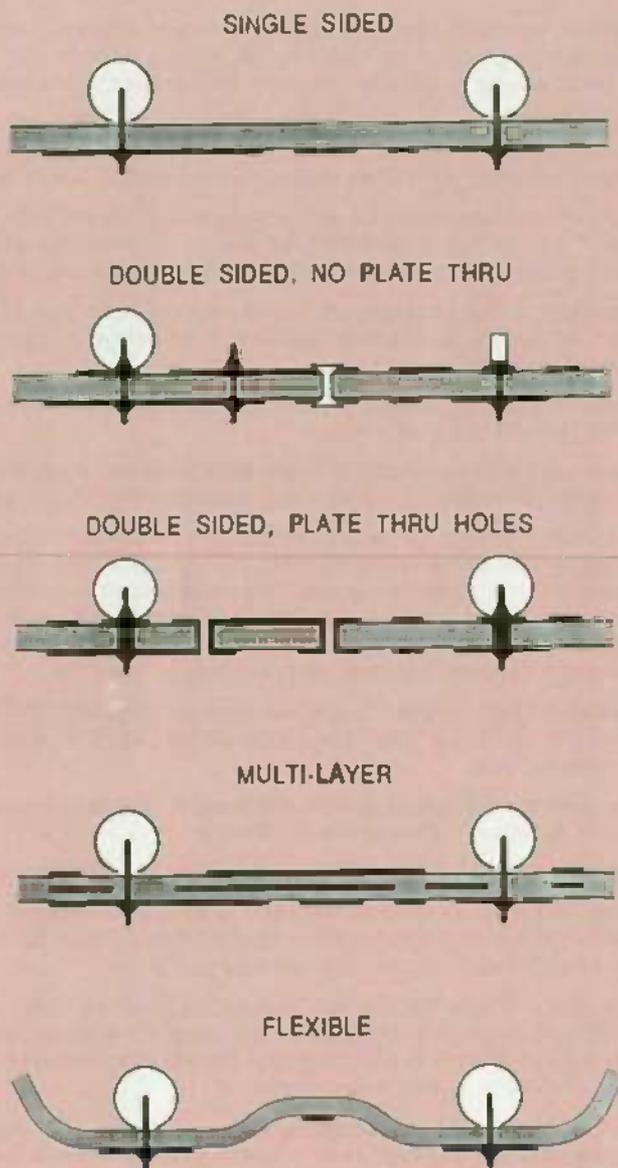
SEVERAL POPULAR TYPES of printed-circuit boards. Note that a double-sided plate-through board can be hacker-faked by using component leads, eyelets, wire tabs, or low-cost individual pin sockets.
